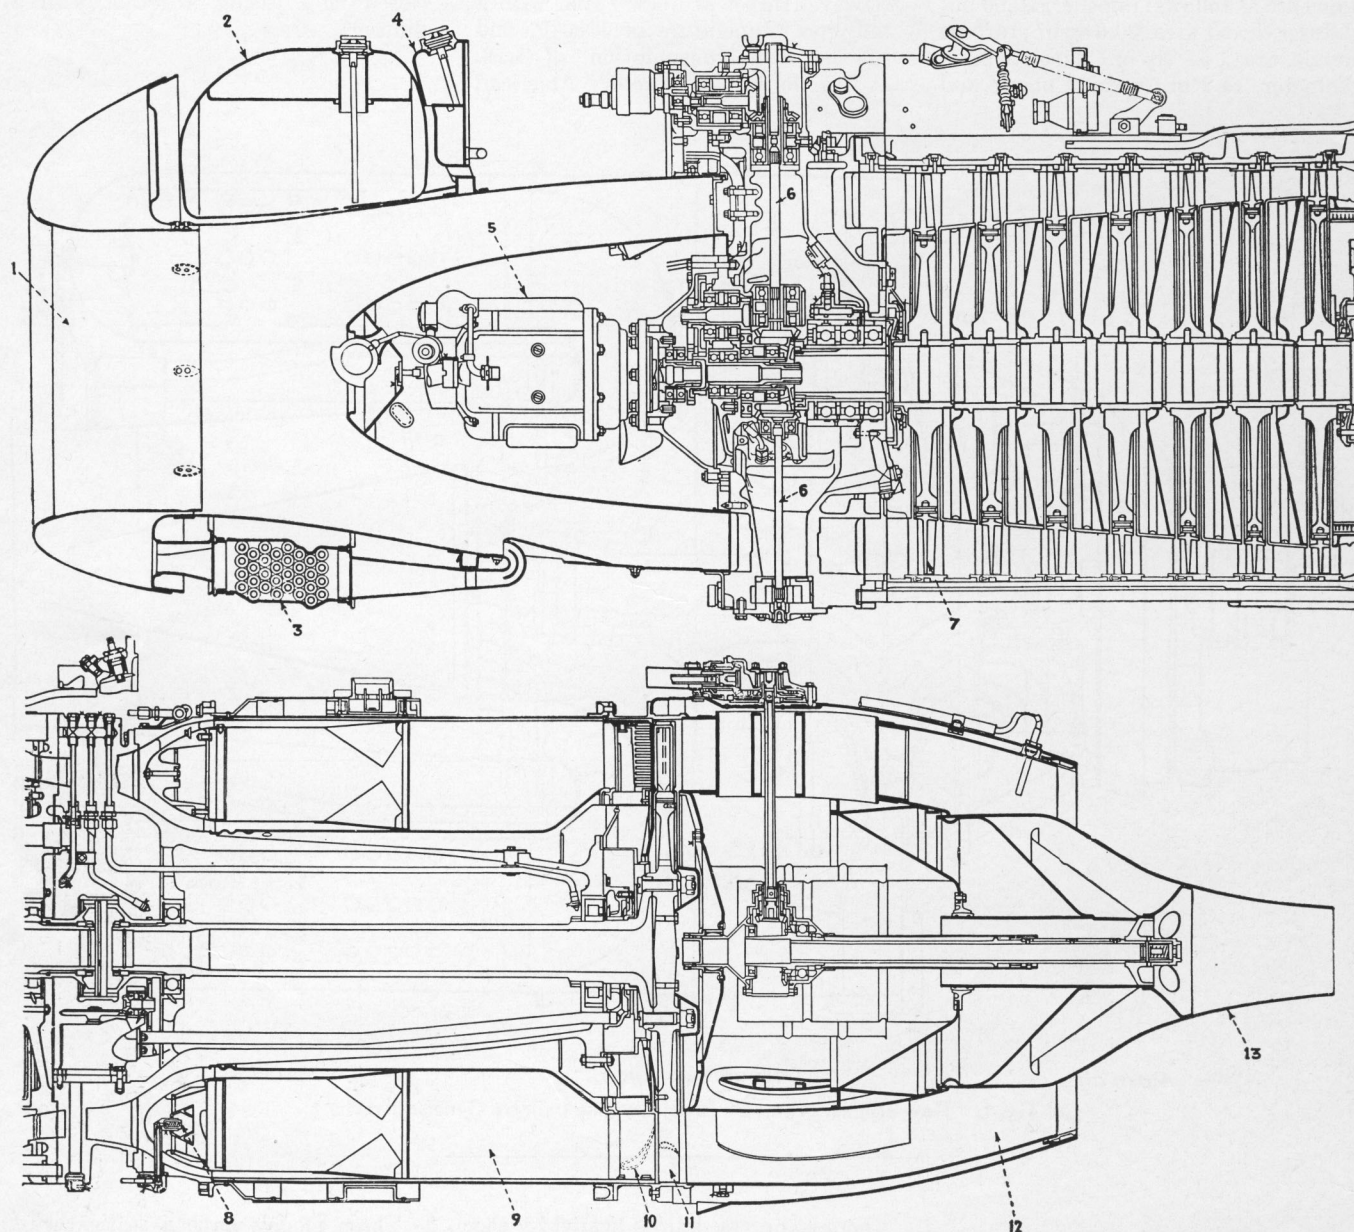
Sectional view of the BMW-003 jet showing: (1) air intake; (2) oil tank; (3) oil cooler; (4) starter fuel tank; (5) starter; (6) auxiliary drive shafts; (7) compressor; (8) fuel injection nozzle; (9) combustion chamber; (10) turbine nozzle; (11) turbine wheel; (12) thrust nozzle; (13) adjustable tail cone.
